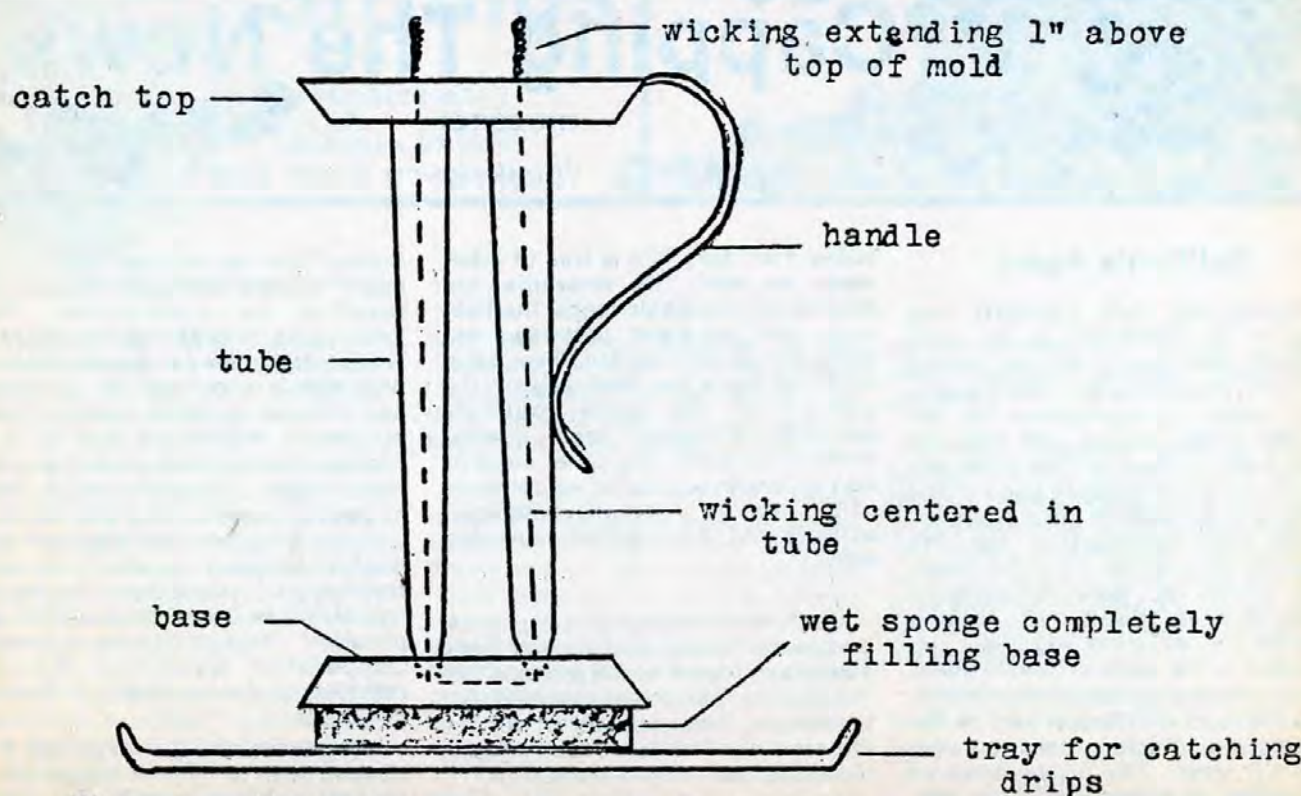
Side view of candle mold showing position of wicking and sponge.
